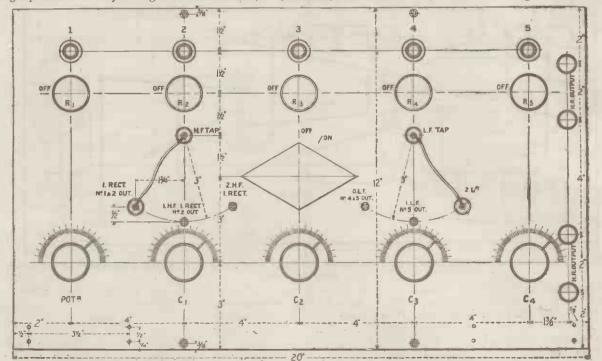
The layout of the panel and drilling dimensions. Blue print No. 94a.
